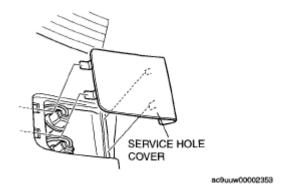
Identifying Service Hole Cover Courtesy of MAZDA MOTORS CORP.
